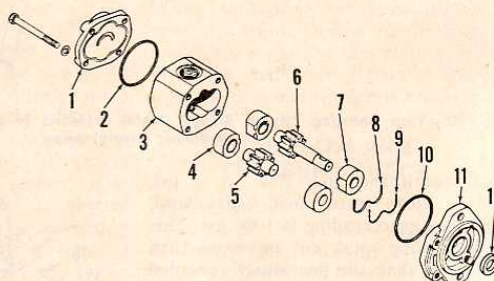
Exploded view of typical Cessna hydraulic pump used on some model 224, 444 and 446 tractors.
